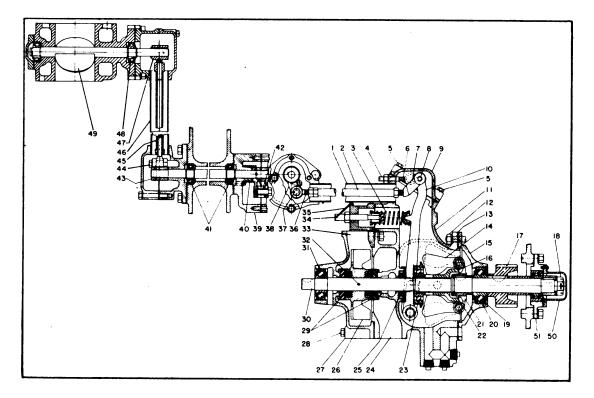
GOVERNOR AND WATER PUMP ASSEMBLY
